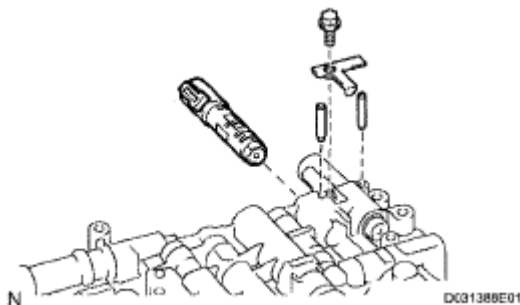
Identifying Bolt, Lock Plate And Straight Pins
